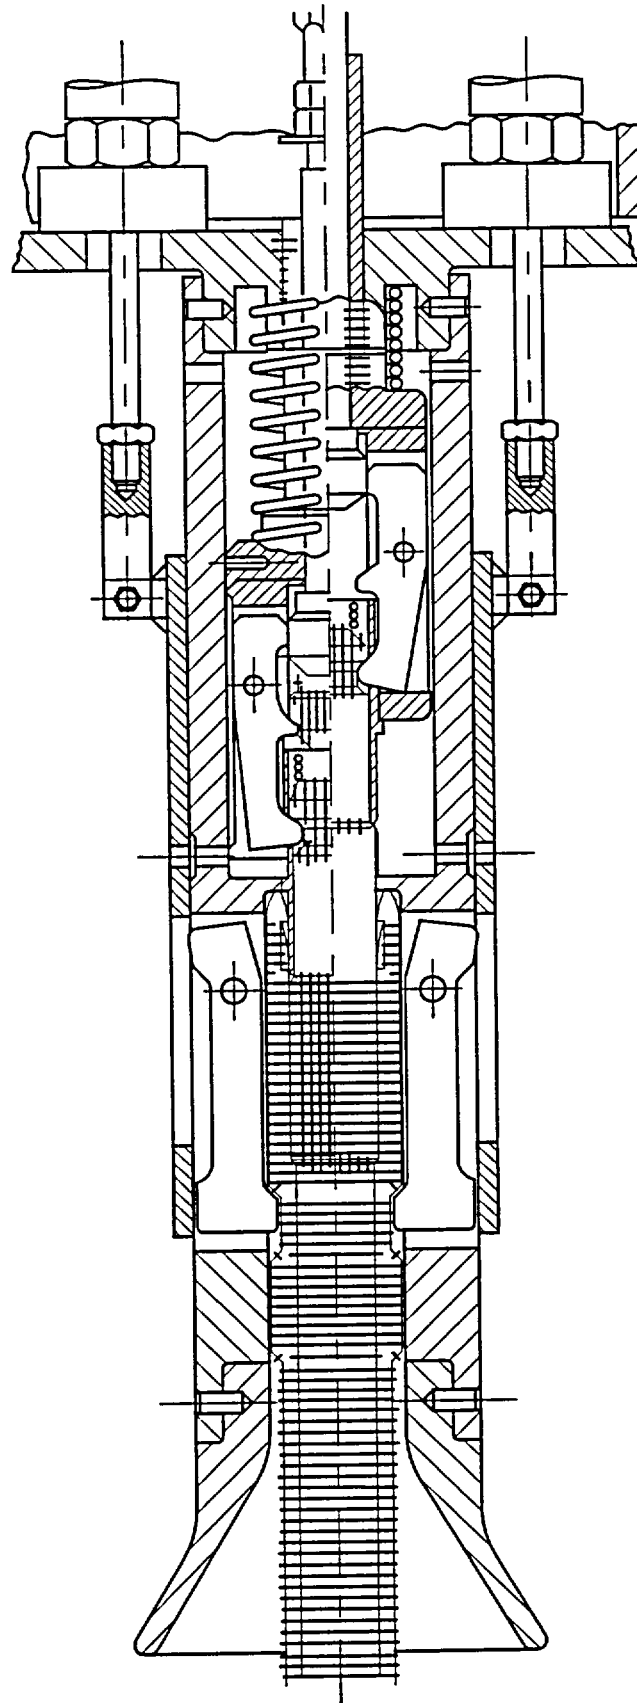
Rod Drive Shaft Unlatching Tool
